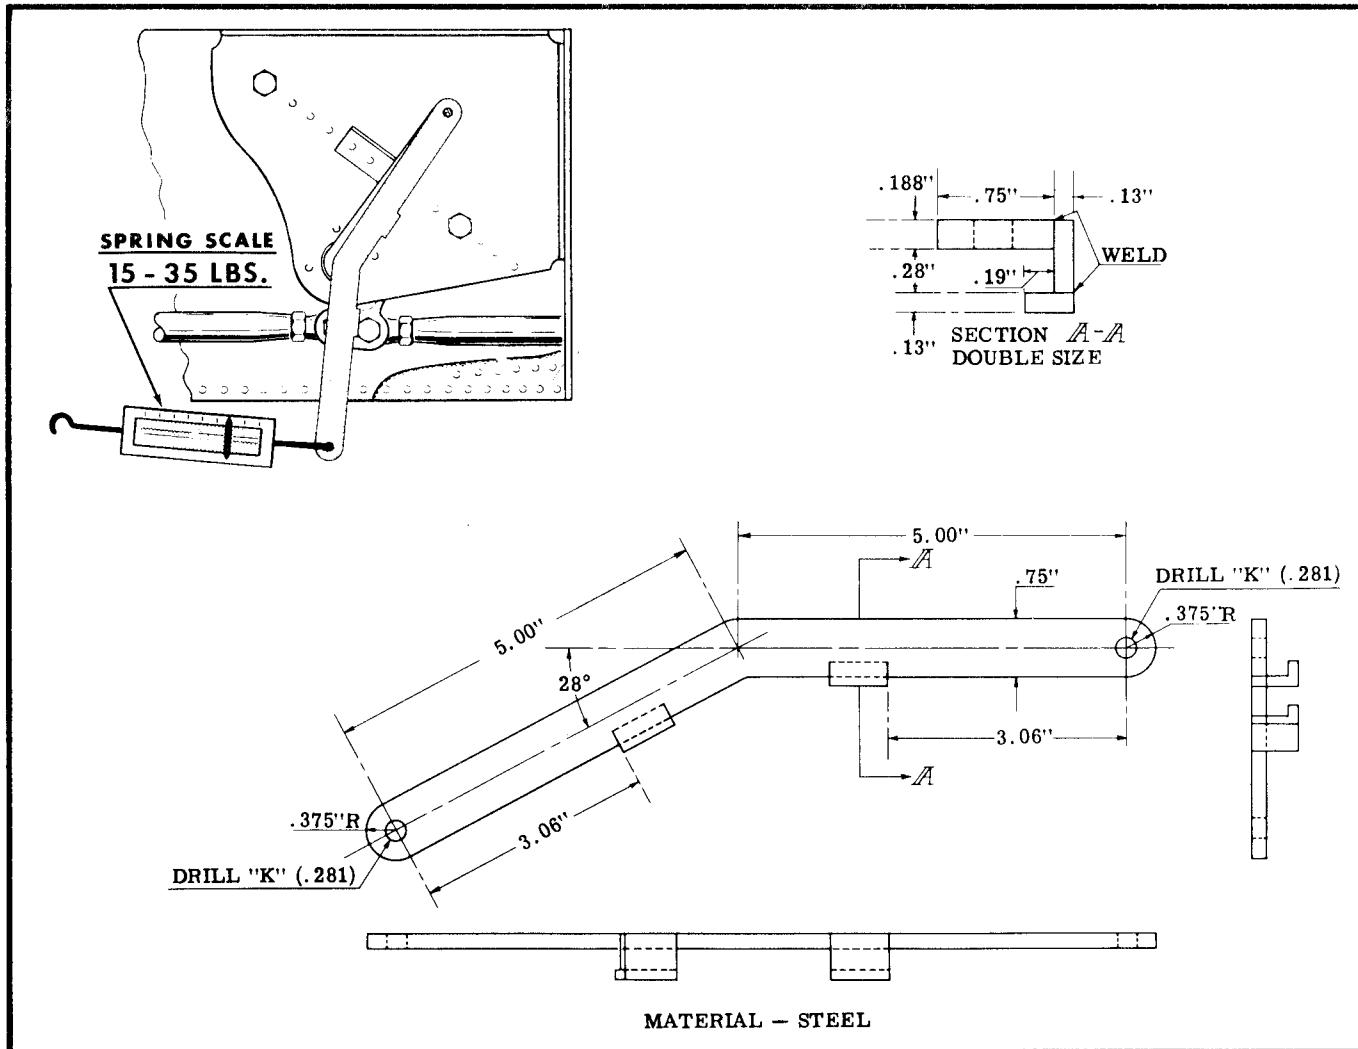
Fabrication and Use of Tool for Measuring Door Actuator Arm Tension
